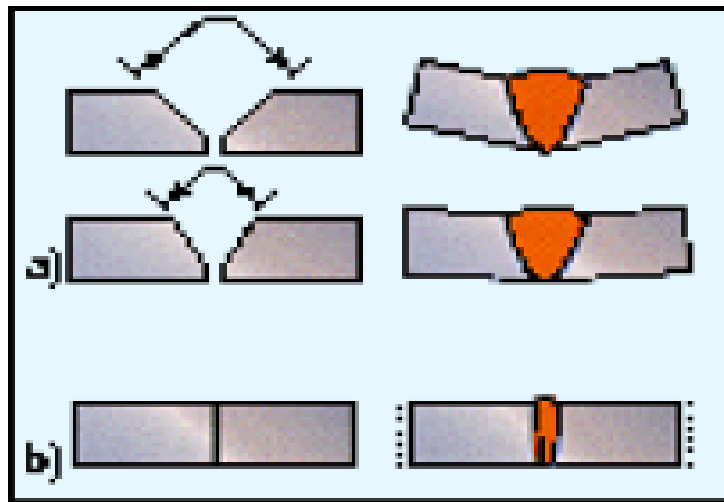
Reducing the amount of angular distortion and lateral shrinkage by: a) reducing the volume of weld metal; b) using single pass weld
